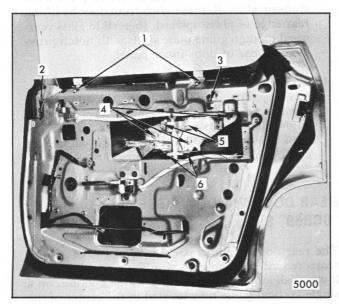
Rear Door Window Removal and Adjustment - "6CB69" Styles
